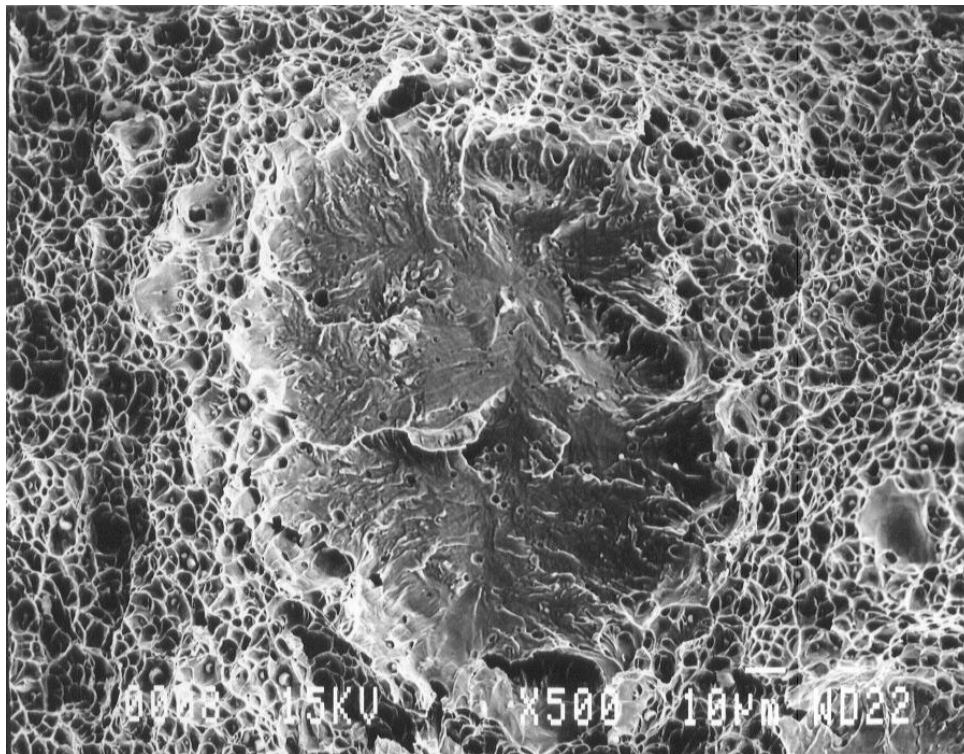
A possible micro-crack appearing on the fracture surface of a 3F3 Charpy bar.
